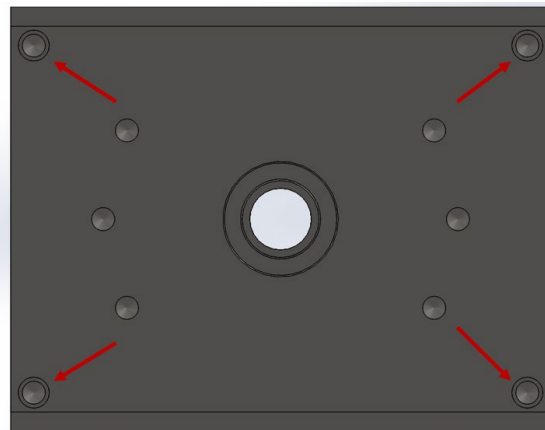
Bolting Problem Points in Original Optical Test Section Design
